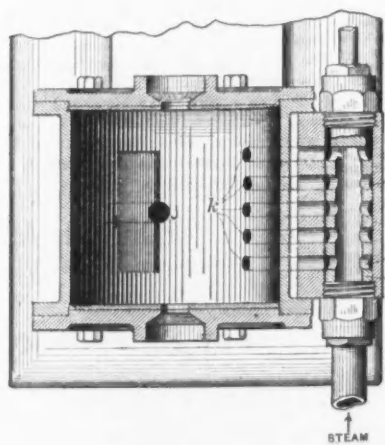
Longitudinal Section of Cylinder and Valve Chest.
